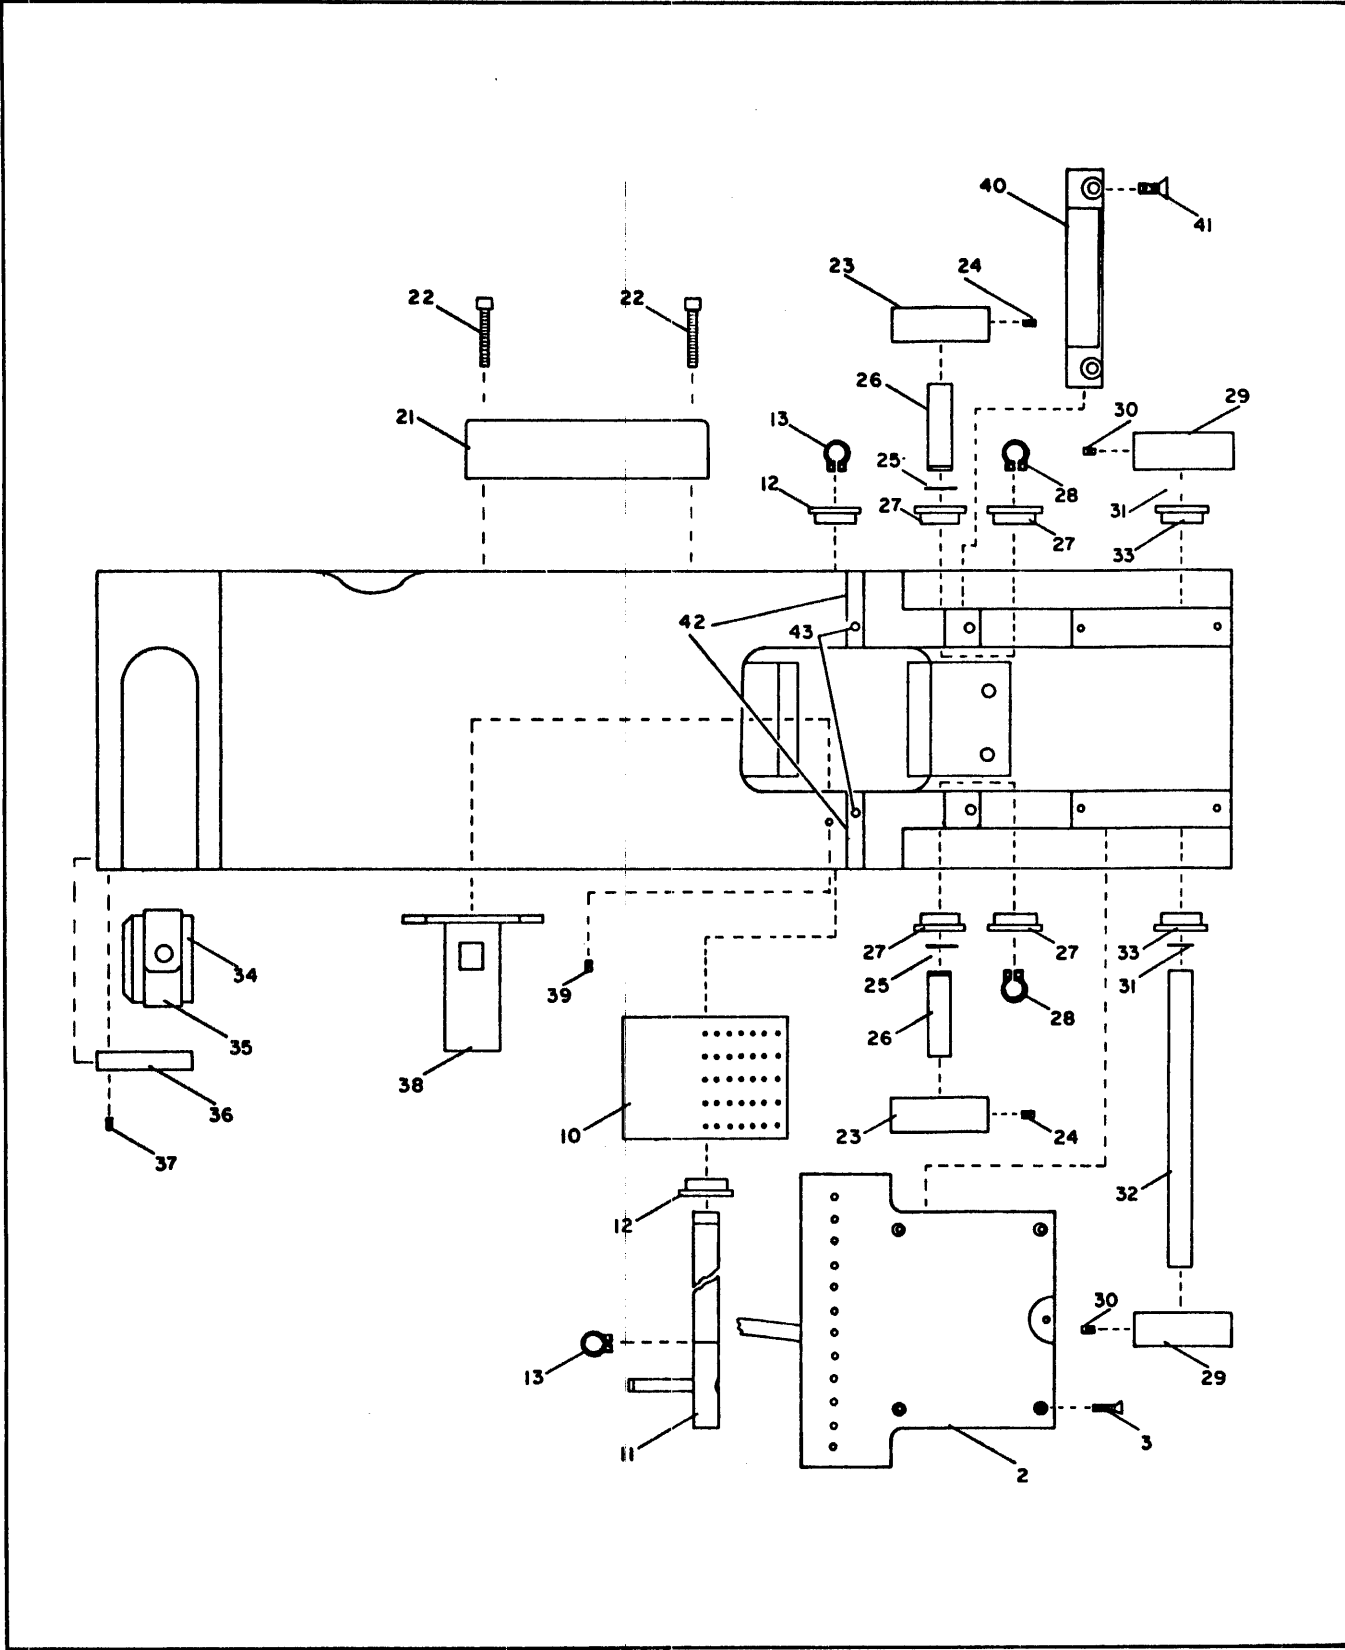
PICK SUPPORT ASSEMBLY (sheet 1 of 2)
